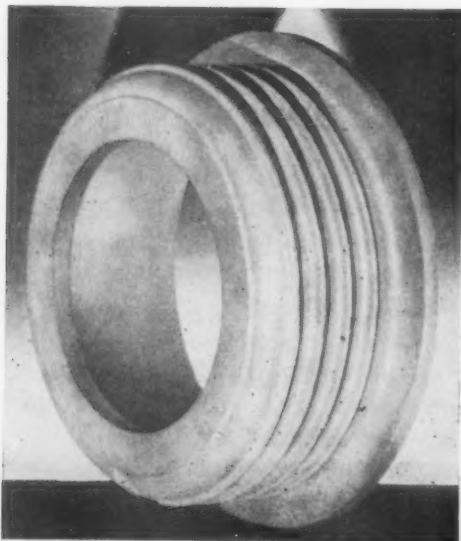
BRAKE DRUM CASTING—WEIGHT 180 LB.
